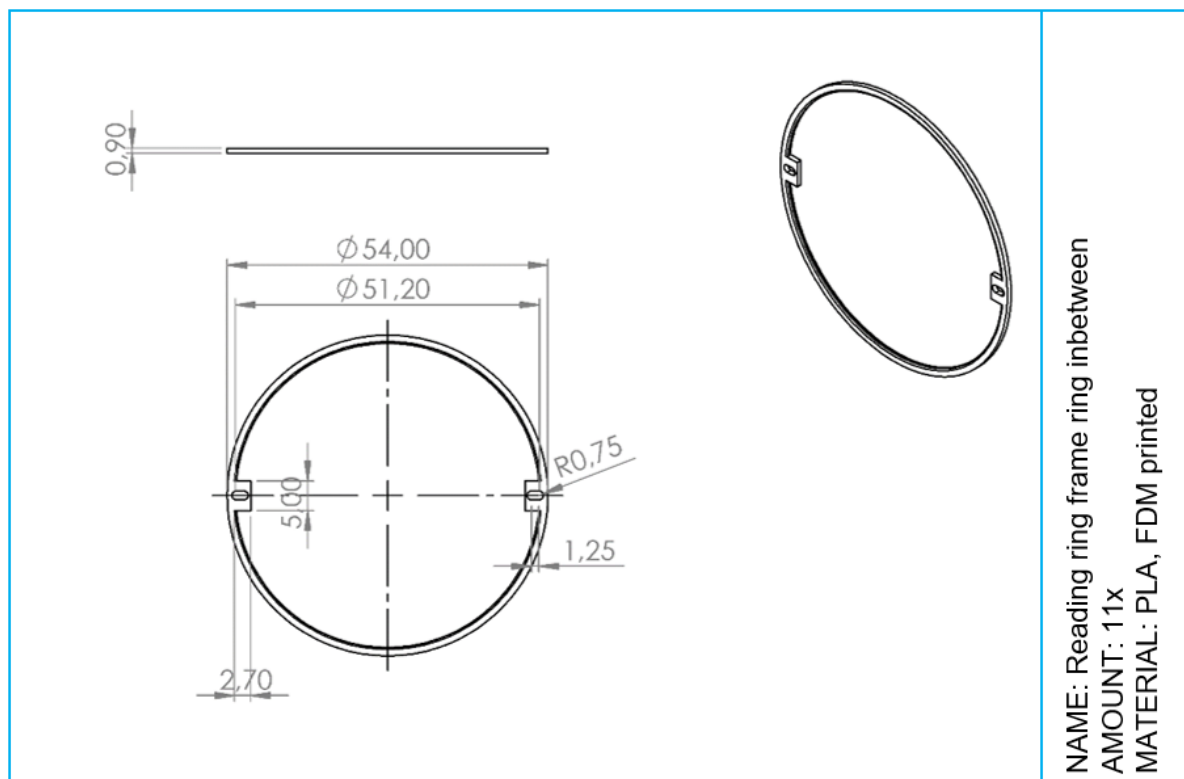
Construction drawings of the reading ring frame in between - 3D Printed prototype
